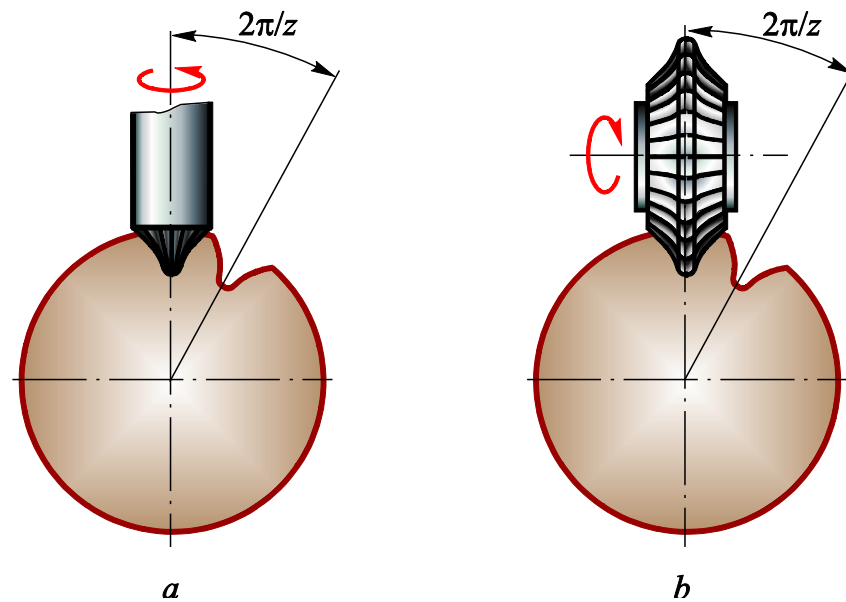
Forming process: *a* – with the help of an end-mill type gear cutter; *b* – with the help of disk-type gear cutter
